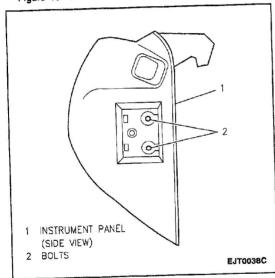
Instrument Panel Fastener Location (Right Side Shown, Left Similar)
